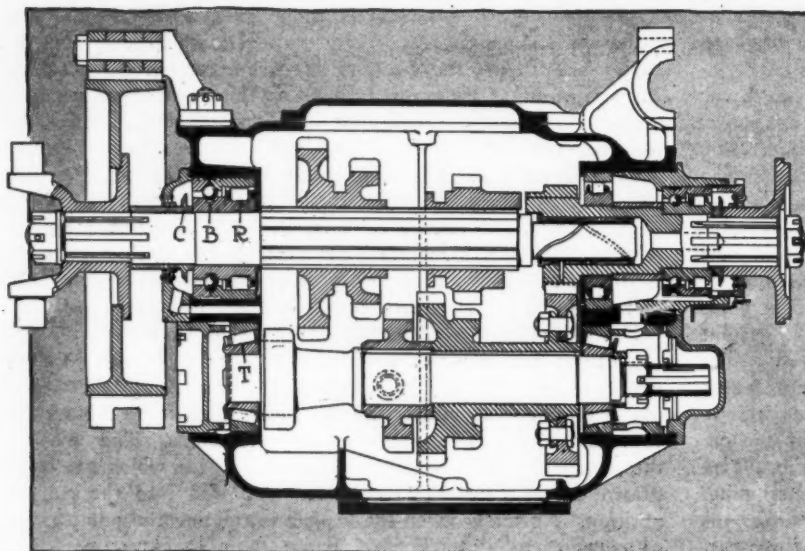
Wolseley gearbox for 16-20-horsepower car
